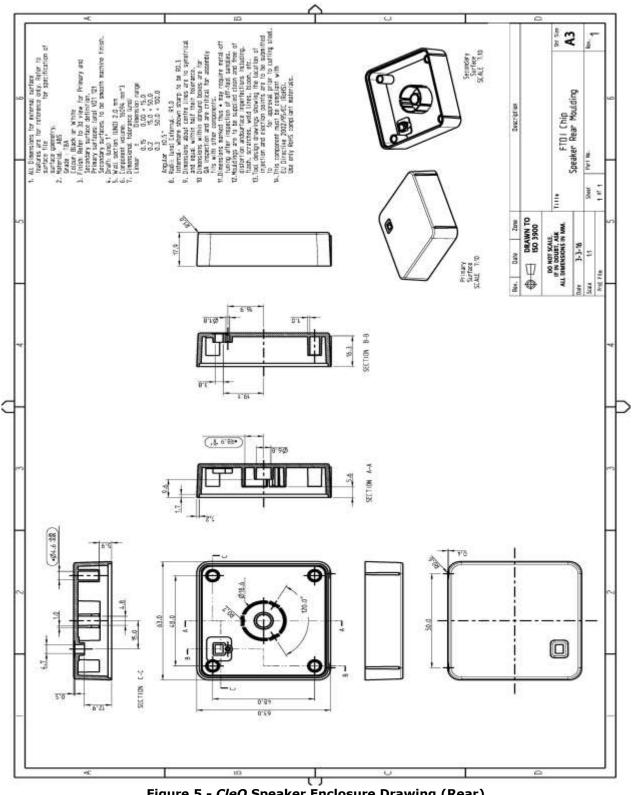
CleO Speaker Enclosure Drawing (Rear)
